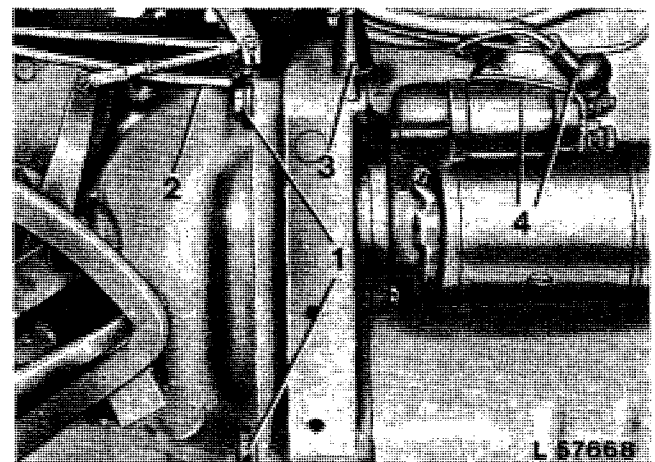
Separating between Engine and Clutch Housing, R.H. Side
